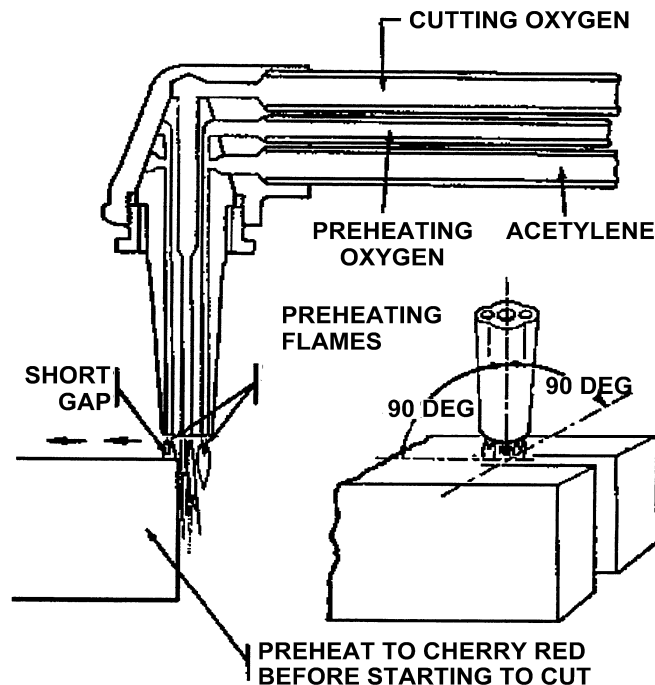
Starting a Cut and Cutting with a Cutting Torch
